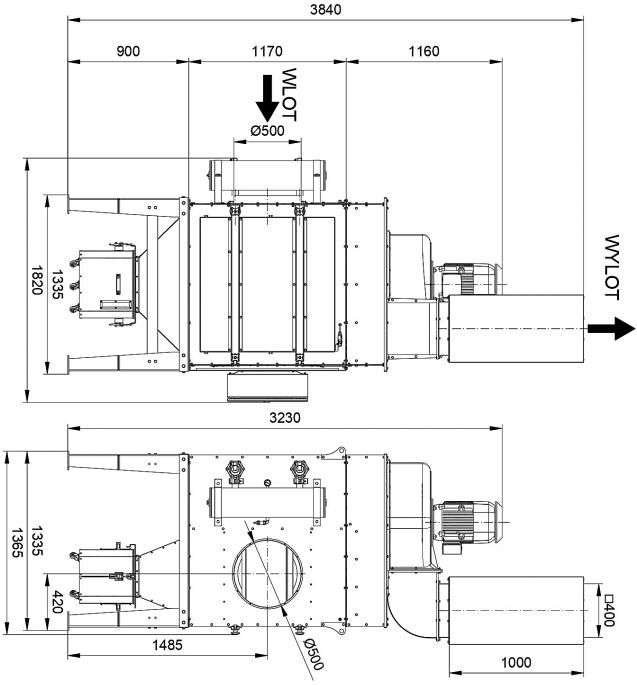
Overall dimensions of the device UFO-A-5000-N(/R)-LH (with an inlet on the left)
